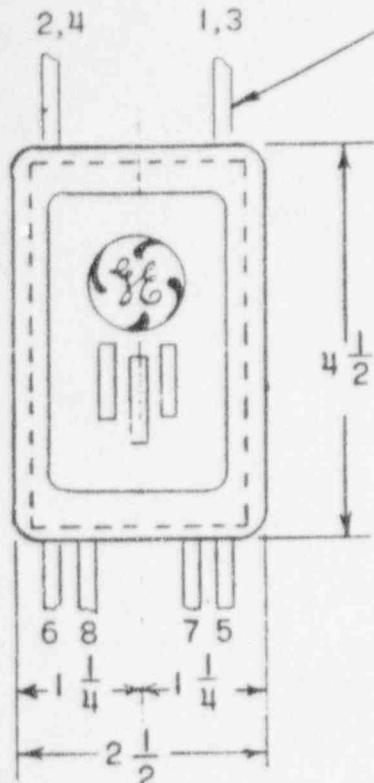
(06077058-019) Outline and Panel Drilling for Surface Mounting of HGA17A and HGA17H Relays
